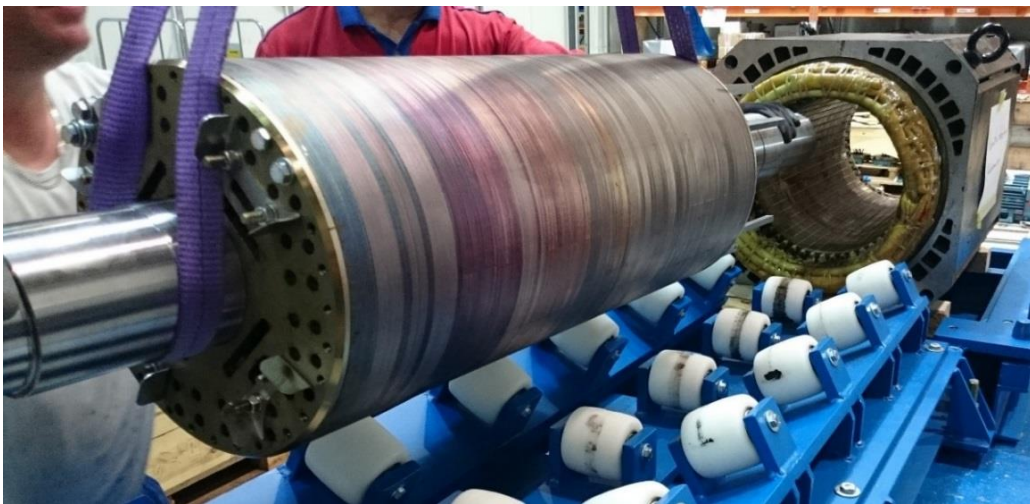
Rotor height adjustment jig with nylon rollers when PMASynRM prototype rotor is set on it.
